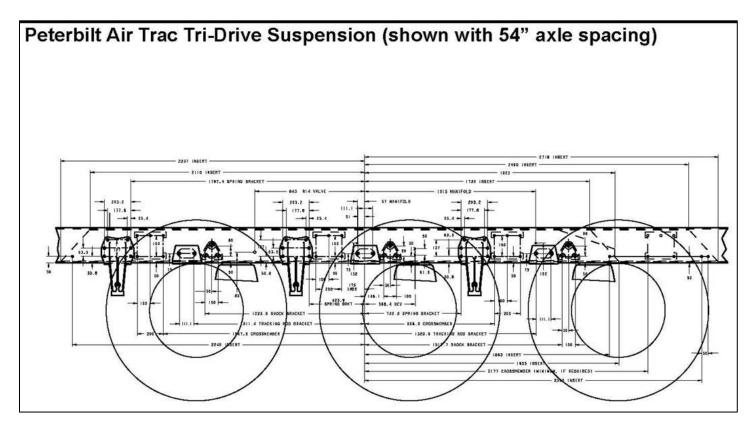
Peterbilt Air Trac Tri-Drive Frame Drilling (Dimensions In Millimeters)
